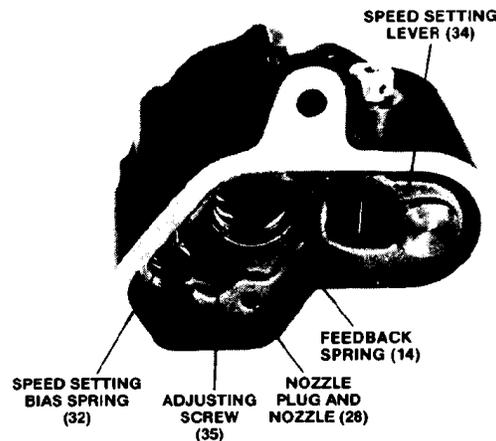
Seating Nozzle (28) with the Nozzle Plug
